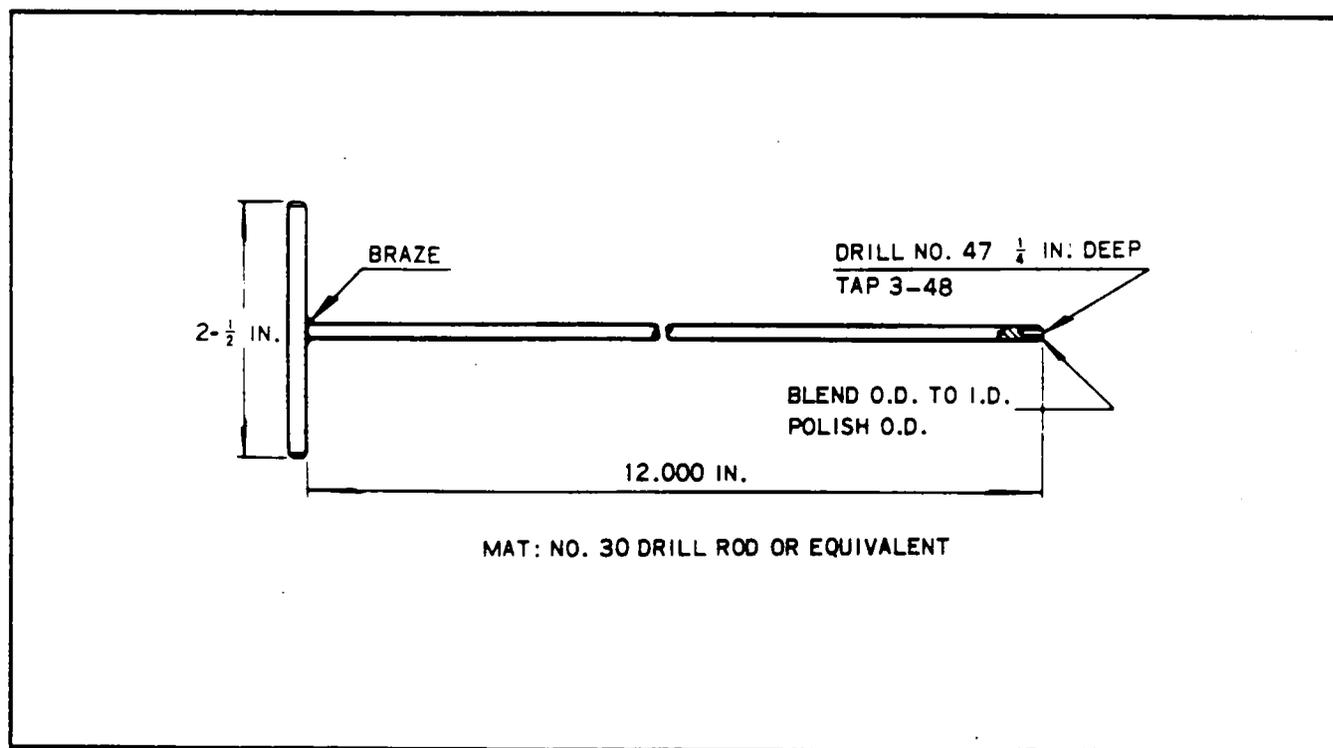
Assembly Tool For Ignition Harness Insulating Sleeve Installation
